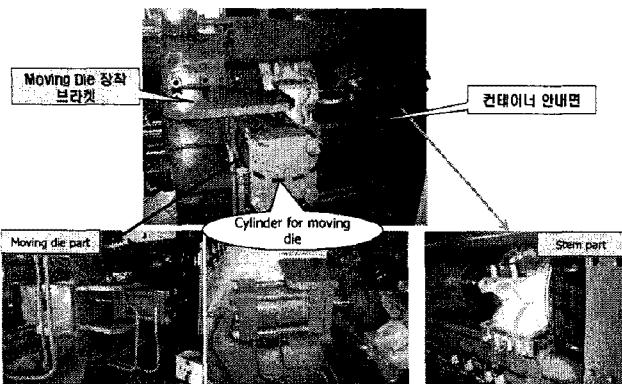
Improved CNC extruder with the first moving cylinder in section extrusion process
